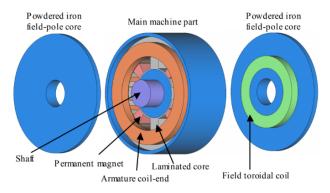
Machine with PMs on the rotor side and excitation winding on the stator side in parallel configuration [42].
